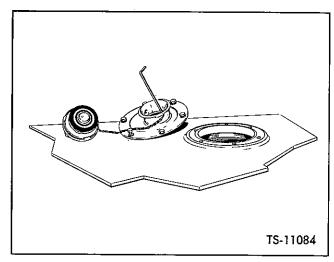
Remove Reservoir Cap, Dipstick and Hand Hole Cover
